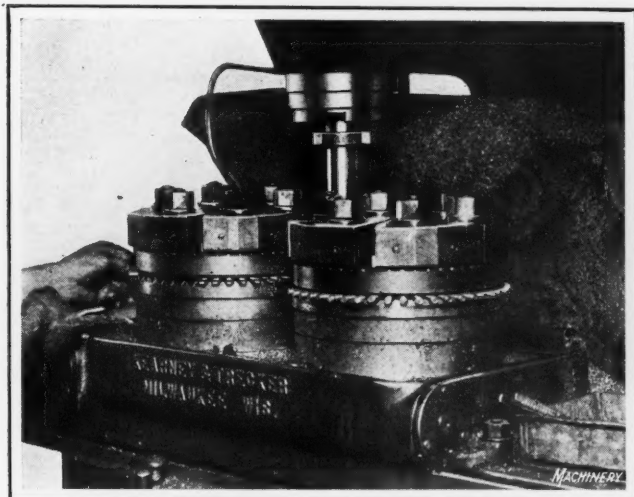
Set-up of Milling Machine employed for slabbing the Ends of the Roller Pins
